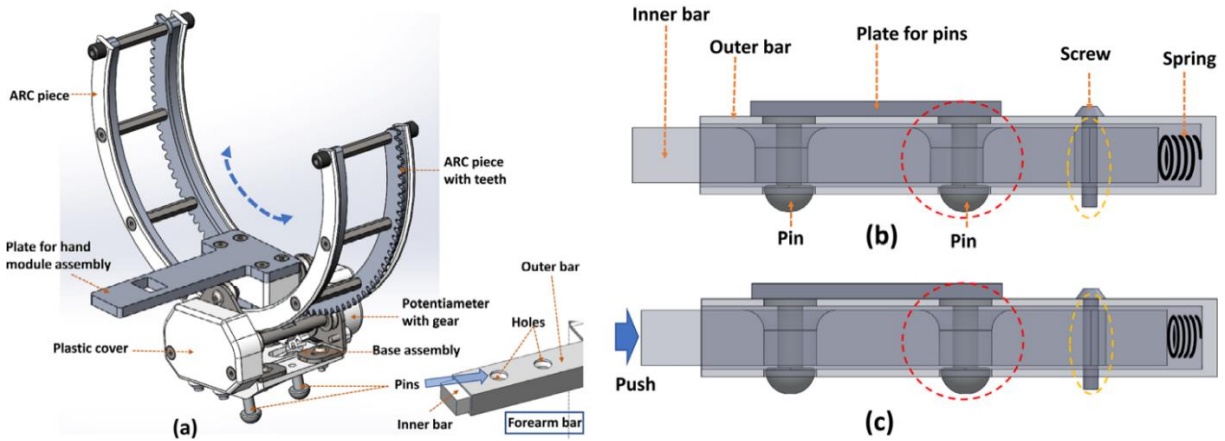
Wrist module: (a) structure and core components, (b) and (c) an illustration of one button release mechanism. Thanks to rounded holes in the inner bar and spring, two pins of the module are simply inserted into two holes in the inner bar and then automatically locked (red circle in (b)). Pushing the inner bar (c) align the holes in the inner bar with those in the outer bar (red circle in (c)), resulting in quick and easy release. The movement of the inner bar is constrained by a screw (orange circles).
